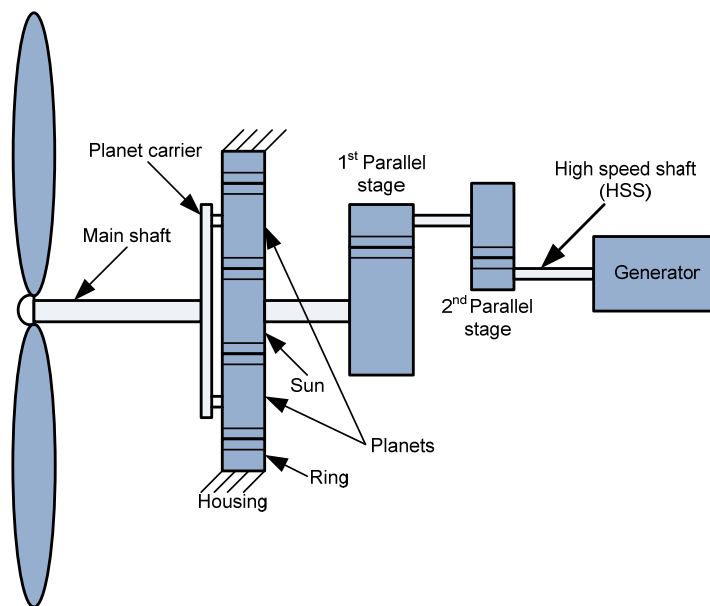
Wind turbine drivetrain with a three stage gearbox
